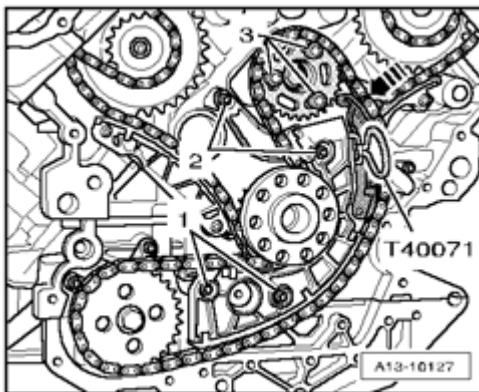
Pressing Chain Tensioner Guide Rail And Securing Chain Tensioner With Securing Pin T40071
